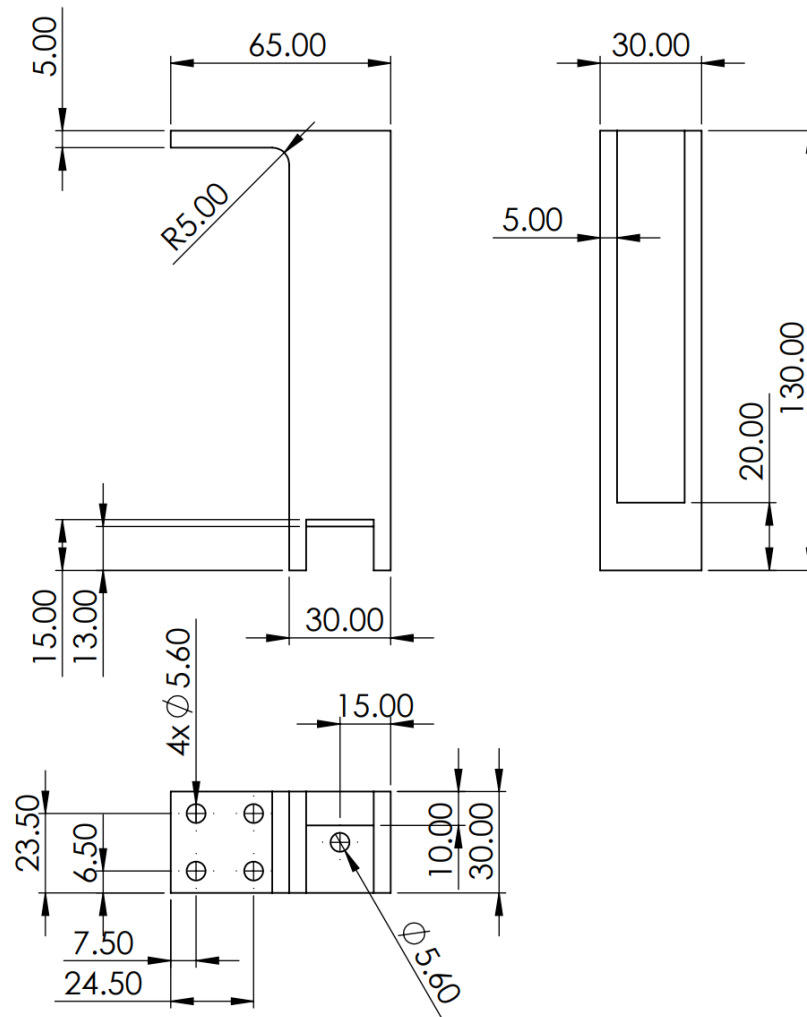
Technical Representation of the Linear Guide 2 Mount.
